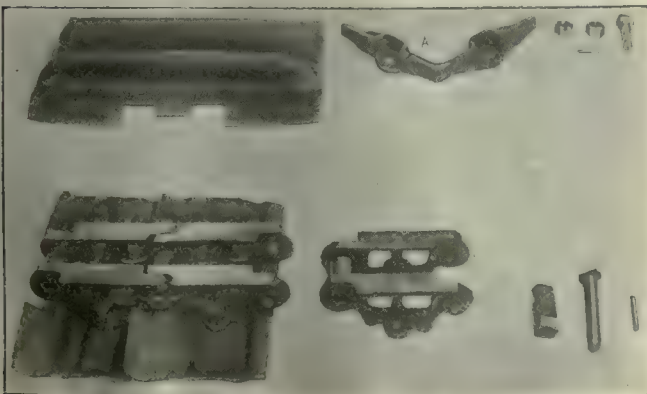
TRACK DETAILS PARTLY ASSEMBLED
